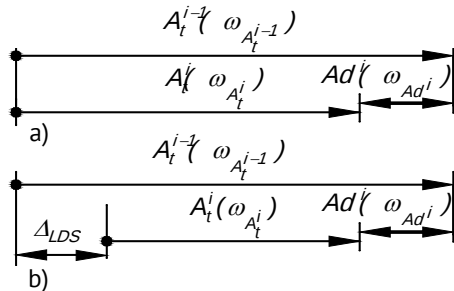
Target transformation of the technological size by removing the machining allowances: a) from only one locating datum surface; b) with the change of locating datum surfaces.
